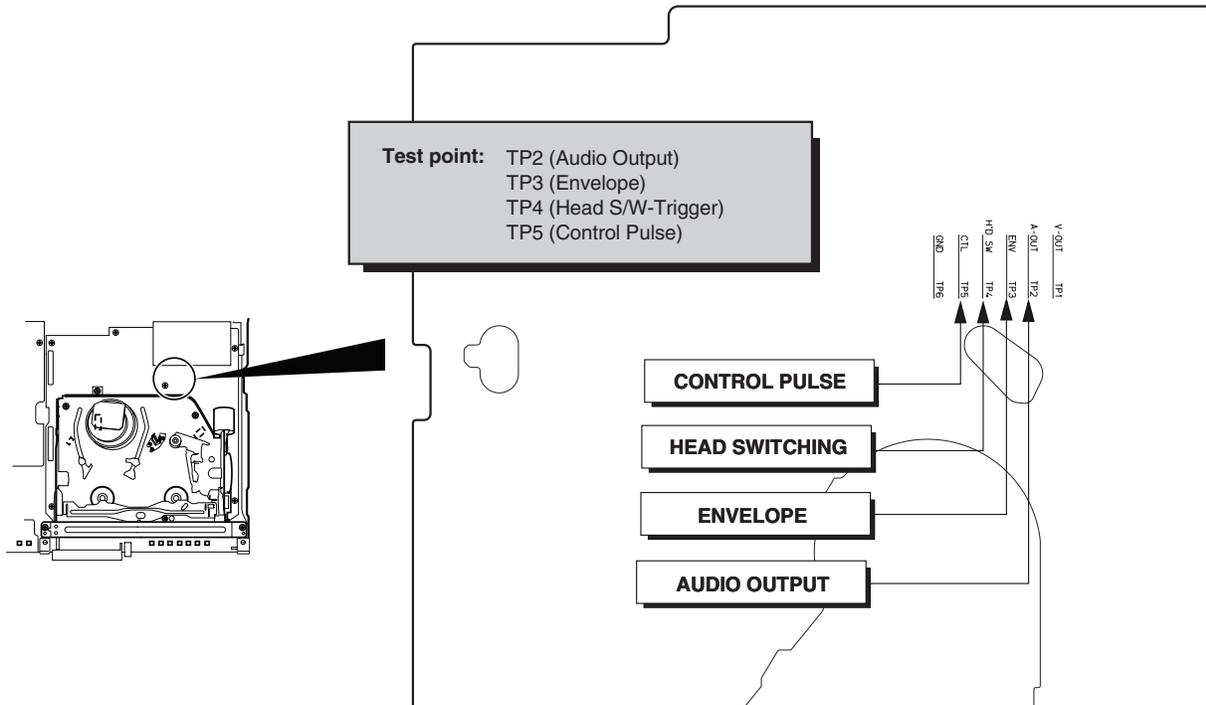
Locations of Test points (VCR Main P.C.B-Top View)
